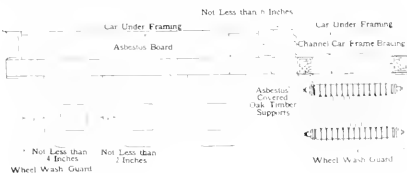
METHOD OF MOUNTING GRID RESISTORS FOR 600 VOLT SERVICE
